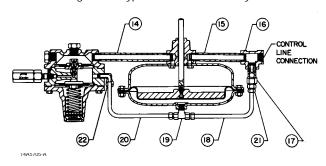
Type 61LD Pilot and Type1806 Relief Valve Mounting
